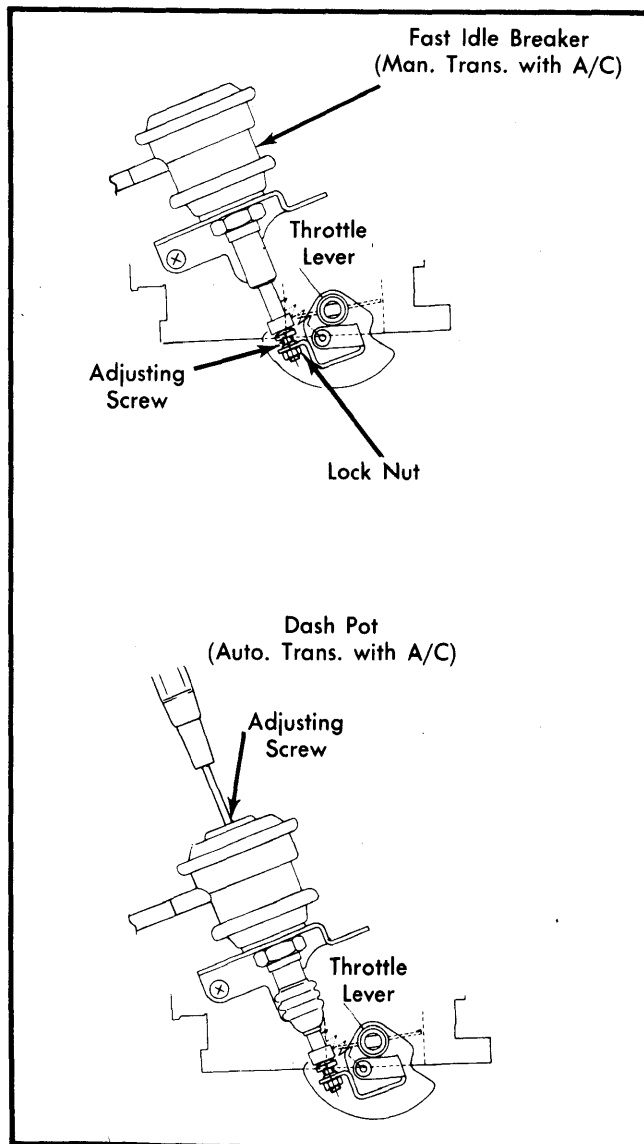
Adjusting Dashpot (Fast Idle Breaker)
